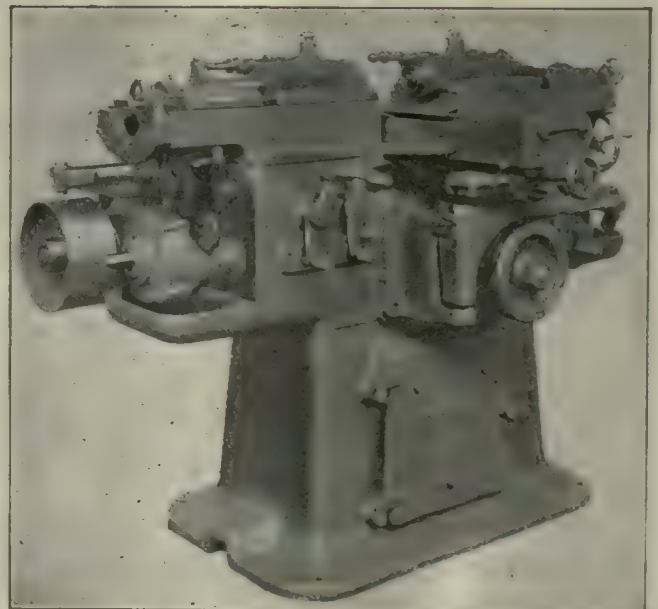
TAYLOR & FENN SPLINE MILLING MACHINE
